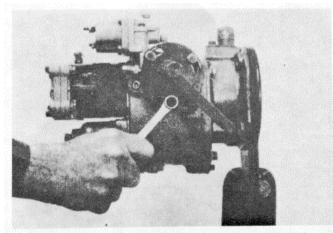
G-70. Installing Service Tool 3375137 on AFC Fuel Pump
